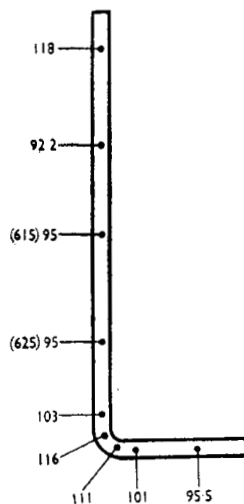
COLD-FORMED ANGLE ON PRESS BRAKE TOOLS
